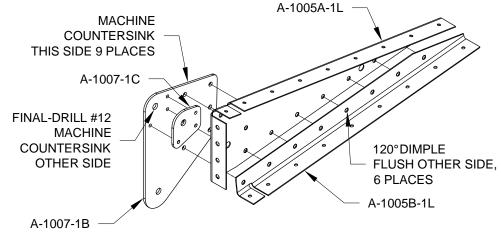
MACHINE COUNTERSINK MAIN RIBS AND HINGE BRACKETS
